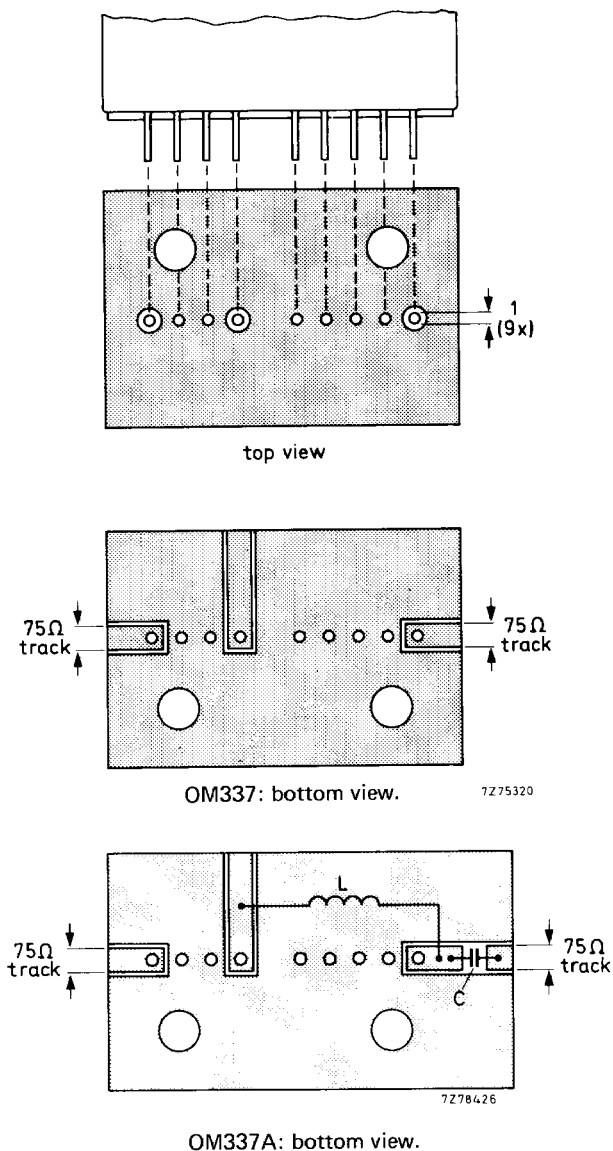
Printed-circuit board holes and tracks for the OM337 and OM337A.
